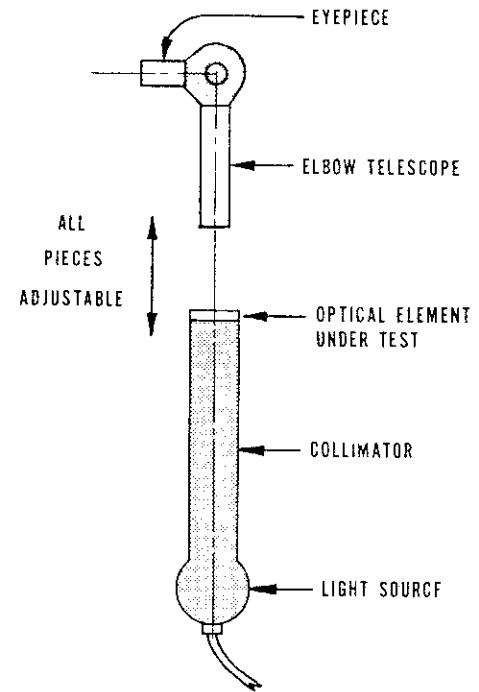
Collimator for checking parallelism of filters, reticles, and other flat pieces of glass
